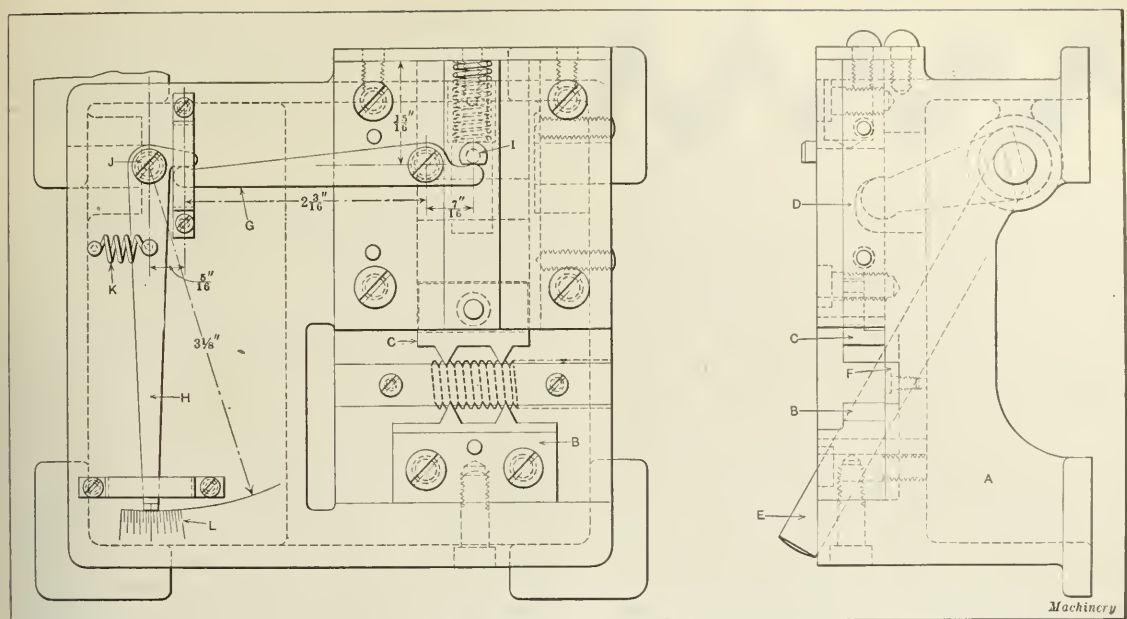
Indicating Gage for inspecting Lead and Pitch Diameter
